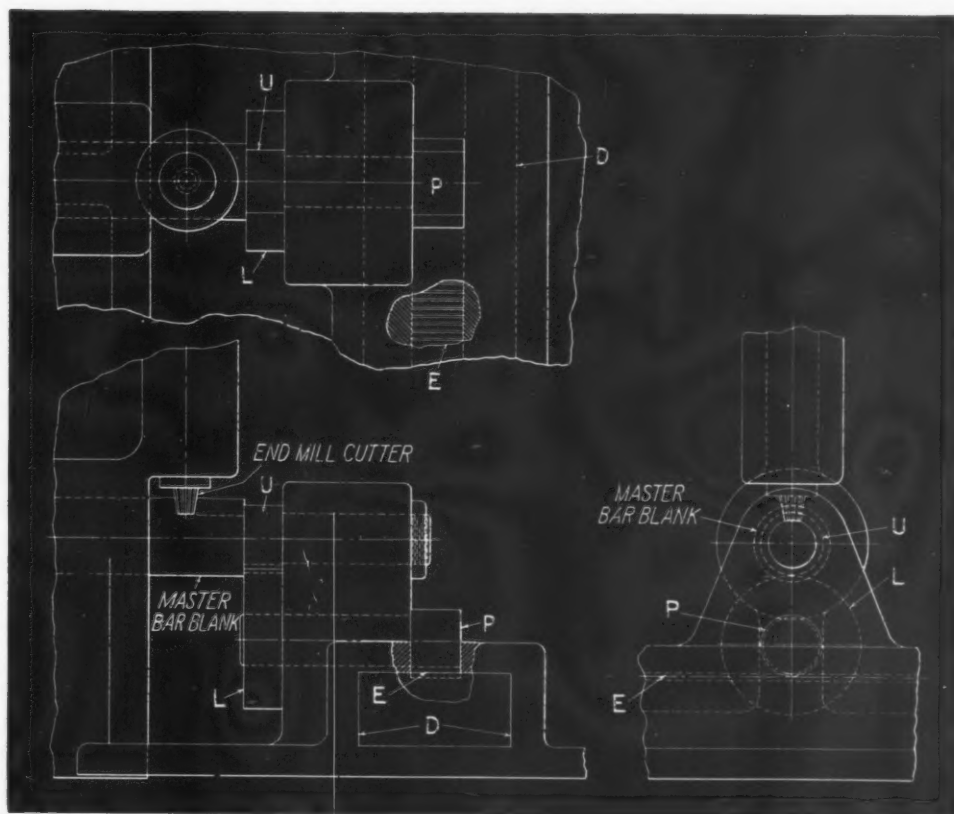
Modified Set-up of the Rifling Mechanism Shown in Fig. 1 being Used to Mill a Helix with a Uniformly Increasing Lead on a Master Bar
